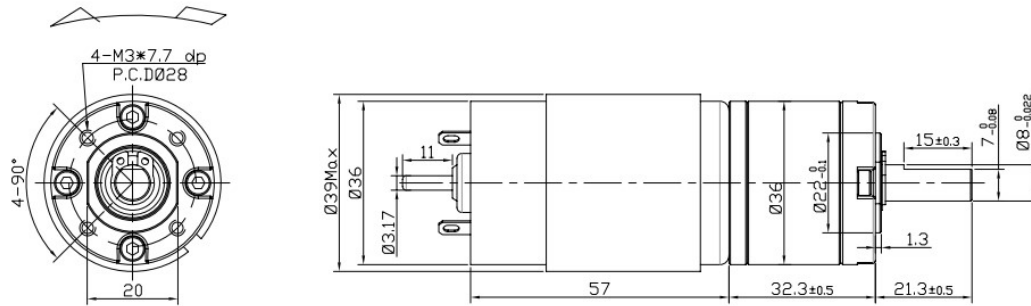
Dimensions of an Orange Planetary Gear of D.C. Motor [40].
